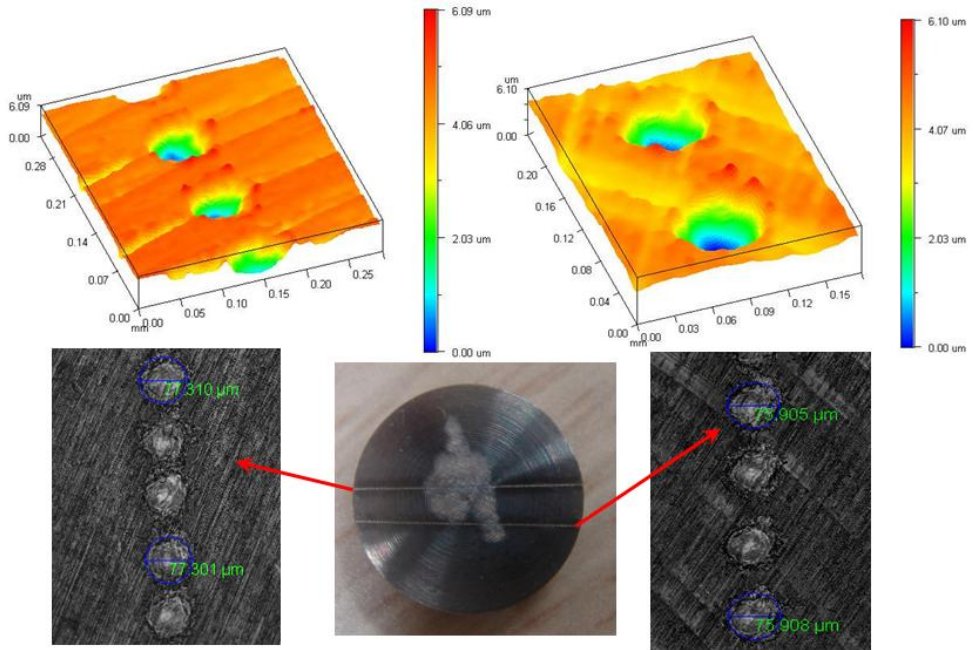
Implant Specimen Sample Test Machining Analysis
